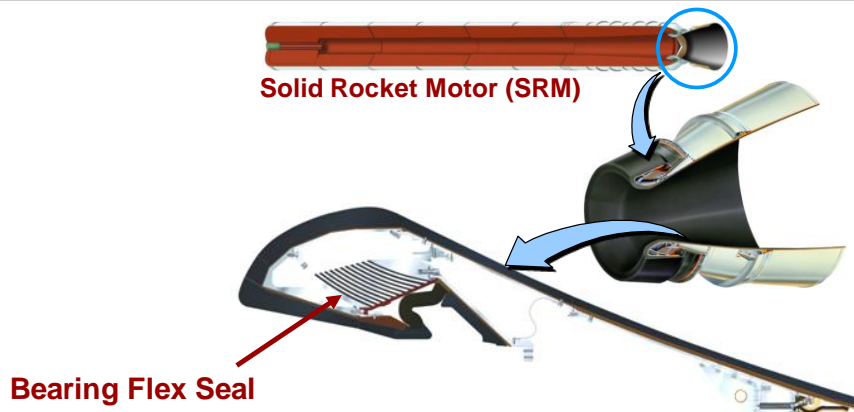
Solid Rocket Motor Gimbaling Nozzle
